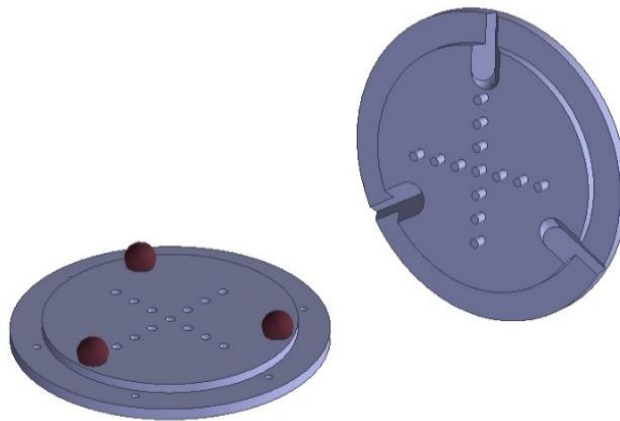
A 3D render of proposed mold inserts to be passively aligned by proposed mechanical joints.
